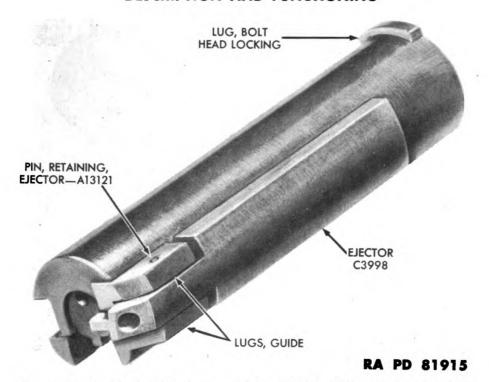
Bolt Head Assembly of U.S. Rifle, Cal. .22, M2, Extractor Removed — Top Front View
